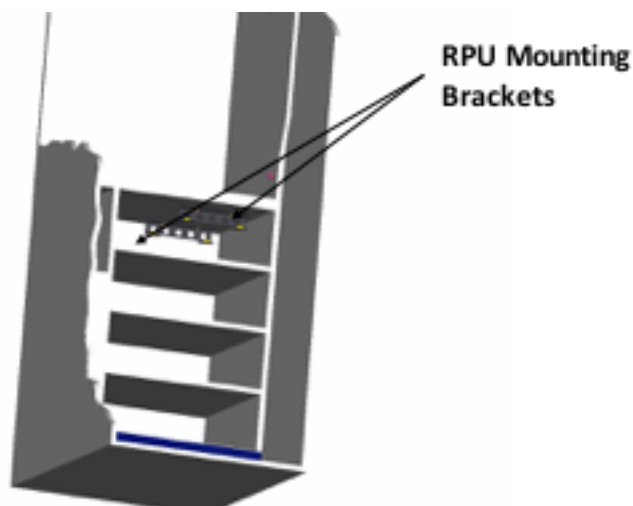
RPU 4 PROVISIONAL POSITION IN THE FORWARD VCC TOP DRAWER (DRAWERS SHOWN REMOVED FOR CLARITY)
